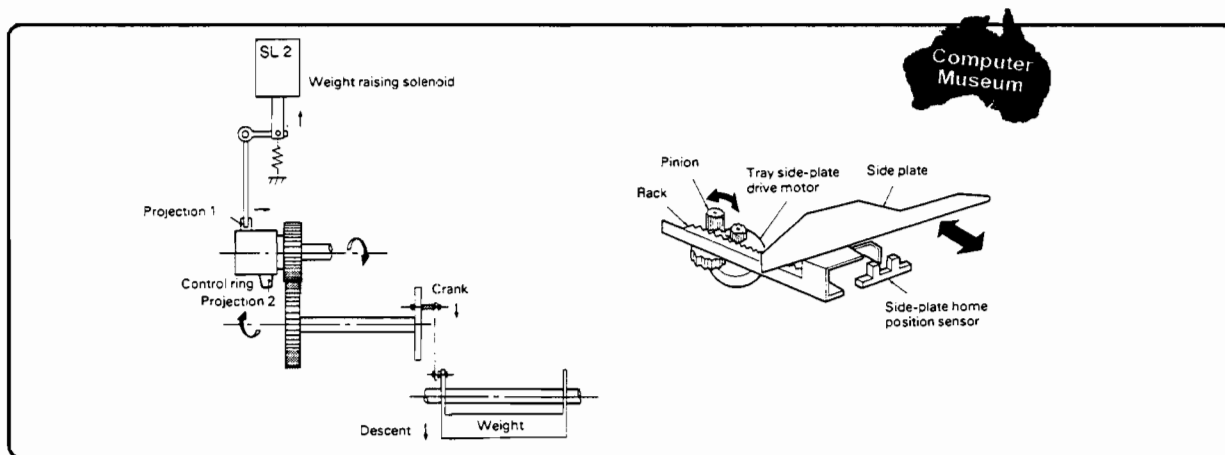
Holding Tray Side Plate and Paper Tray Weight & Clutch
